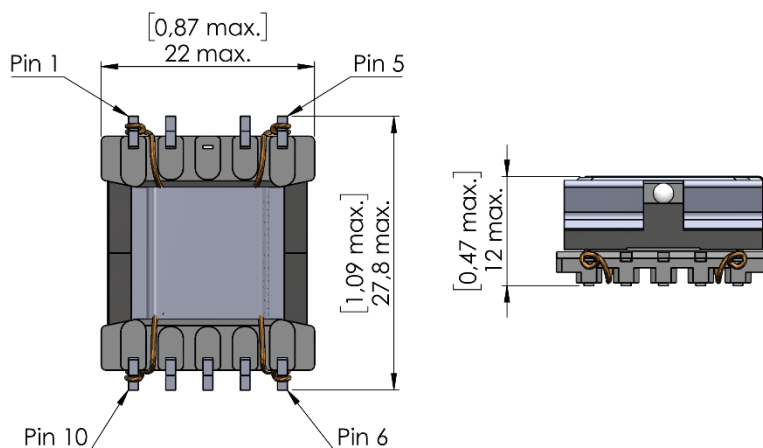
Transformer view bottom and side (dimensions in mm [inch]).
